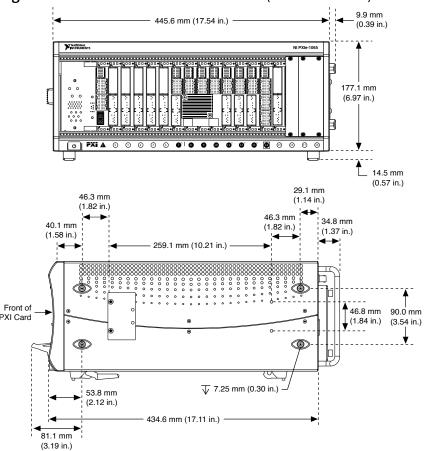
PXIe-1065 Chassis Dimensions (Front and Side)
